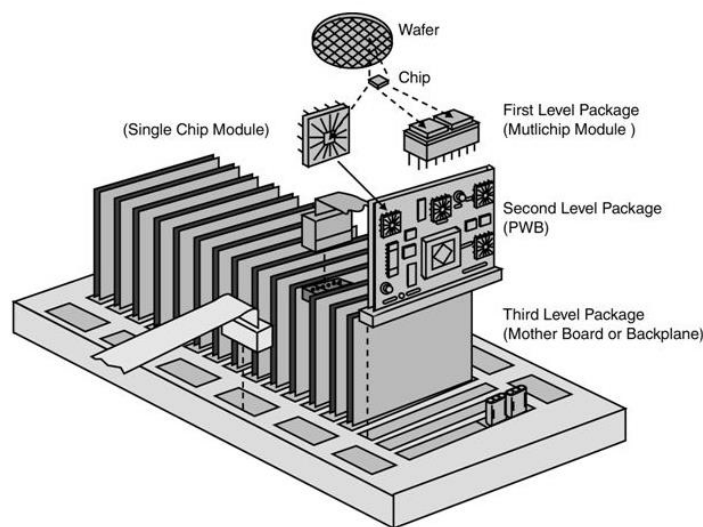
Packaging hierarchy using PCB technology. Image taken from [2].
